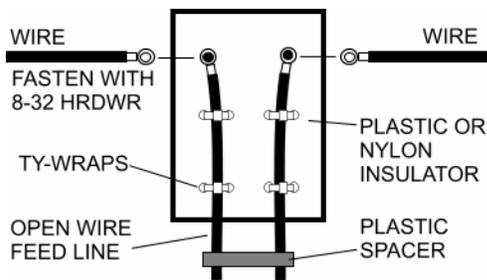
Drawing of center insulator and balanced/open wire feed line.
